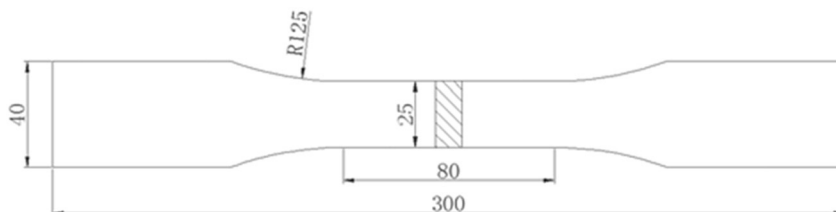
Dimension of fatigue test samples (all dimensions in mm).
